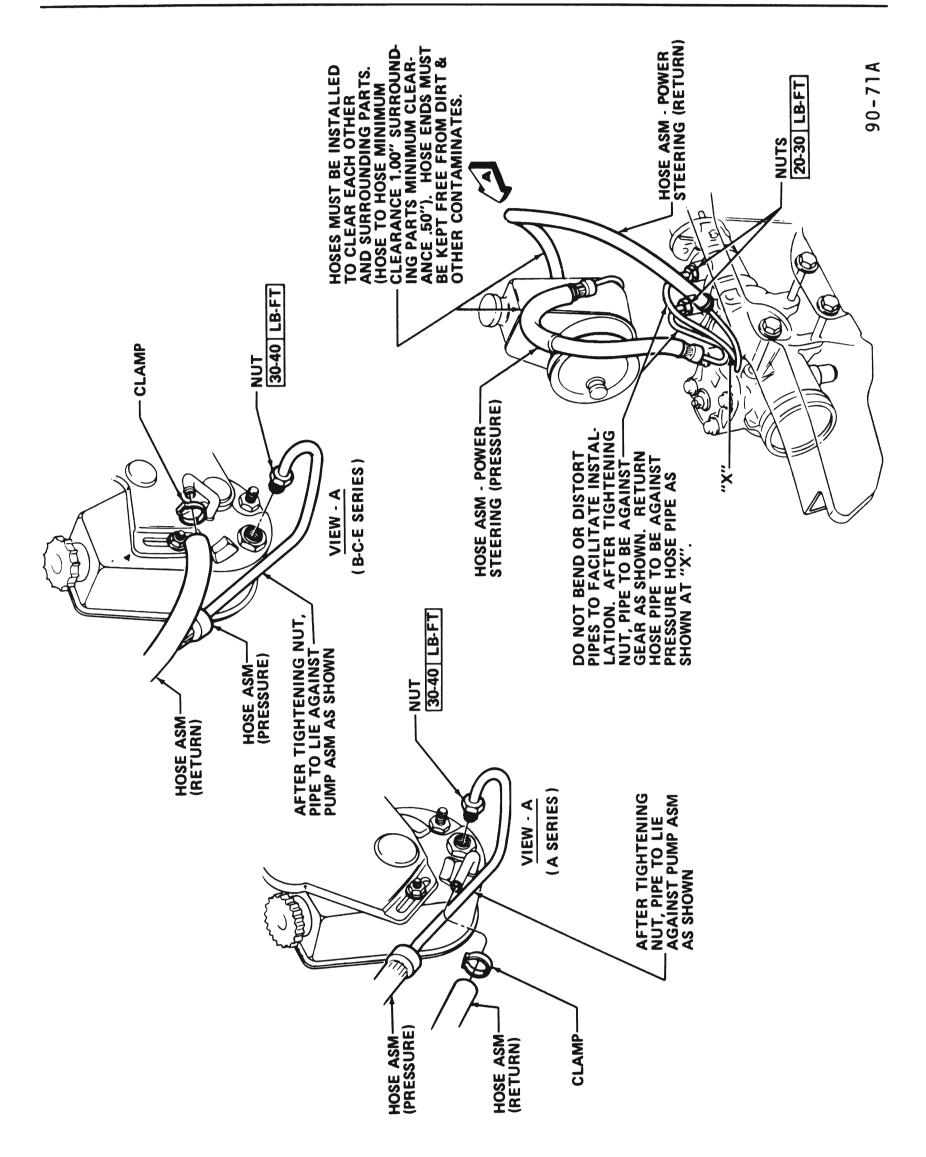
A Power Steering Hose Routing A.I.R. - 455 Engine
